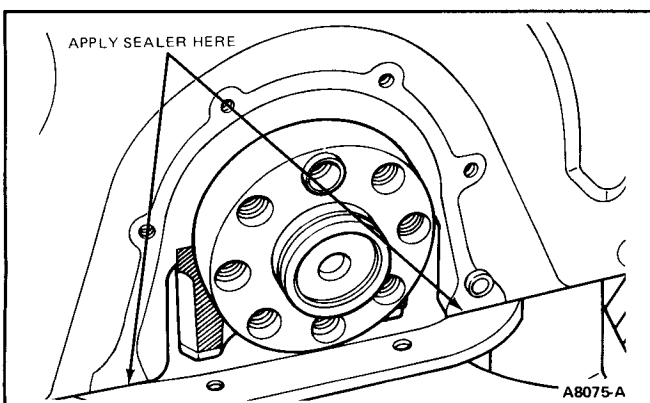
Rear Cover Gasket to Oil Pan Sealing Points
